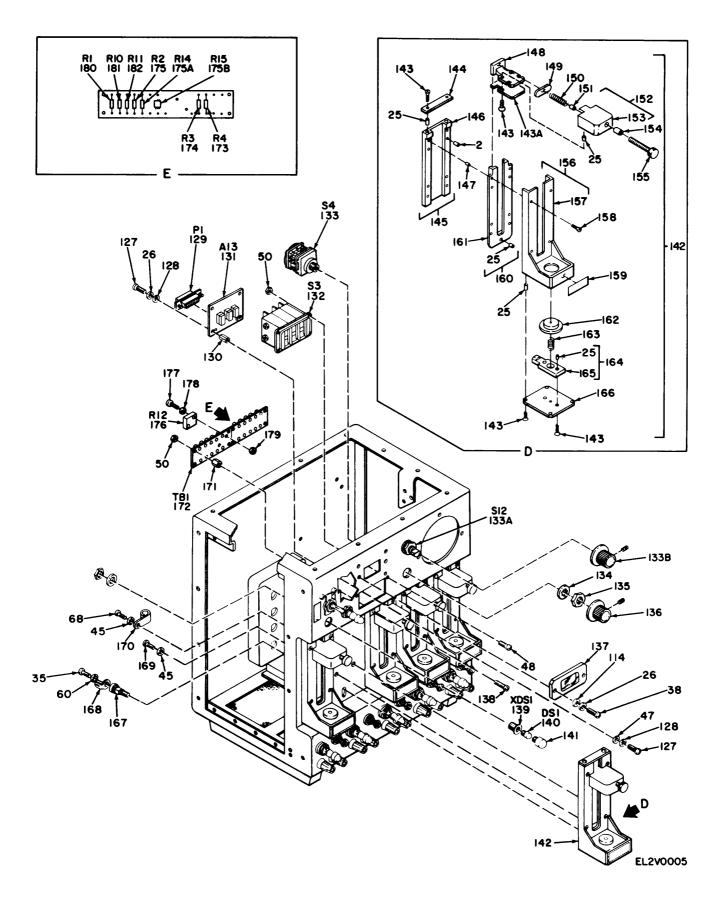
Battery Charger Assembly (Sheet 2 of .2).
